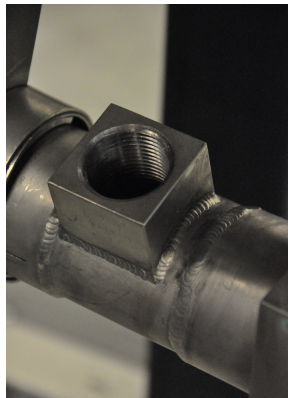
Threaded fitting in pump discharge for pressure transducer.
